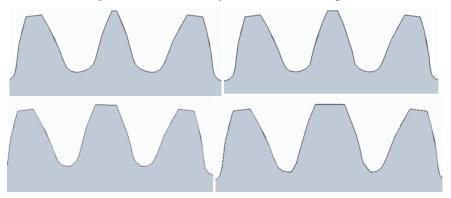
The modified teeth of z = 50 gears(Top left: tooth reduced by 0.2 mm, top right: tooth reduced by 0.1 mm, bottom left: tooth increased by 0.1 mm, bottom right: tooth increased by 0.2 mm)
